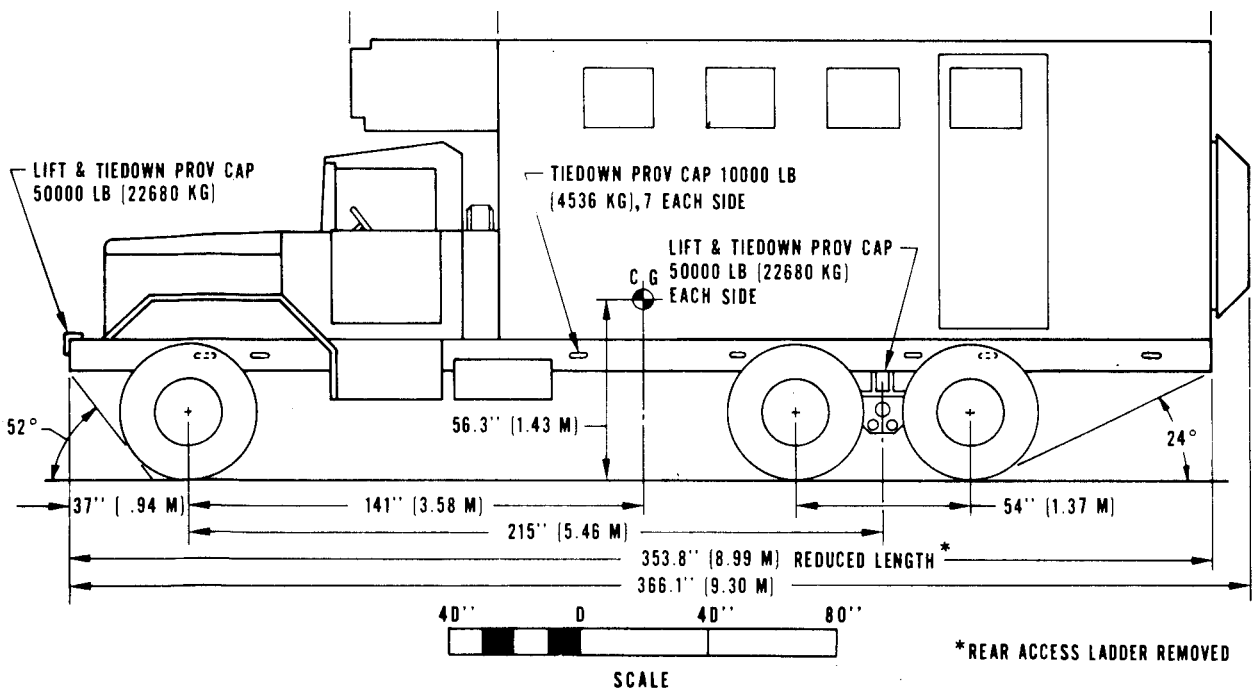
Side elevation, truck, van, expansible, M291A2.
